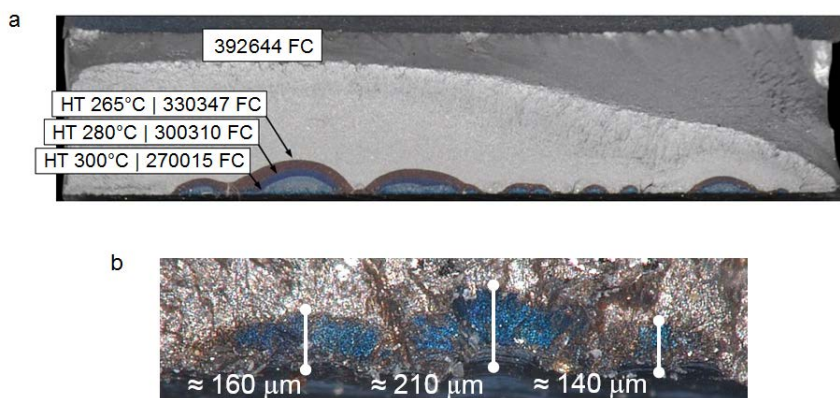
Post-mortem analysis of the fracture surfaces in case of a cruciform joint made of medium strength steel (S355NL): (a) heat-tinting (HT) has been used to make the cracks visible for different fatigue cycles (FC); (b) small cracks marked by means of heat-tinting at about 40% of the total life of the joint.
